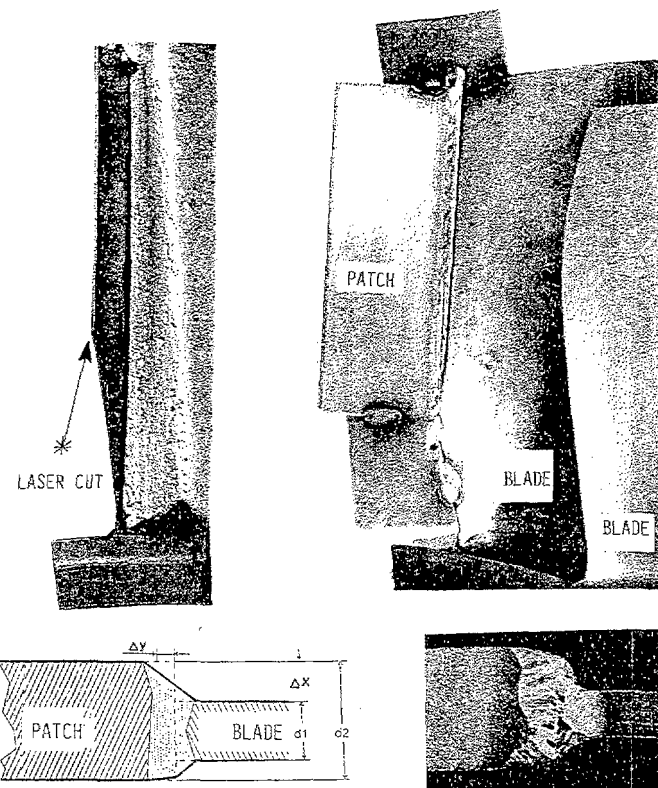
Titanium 6242: repair of aeroengine compressor blades. Top left: the damaged leading edge was cut by CO₂ laser, right: using the same laser station a patch was welded on the cut edge. Above from left: geometry and section of the joint patch to blade.
